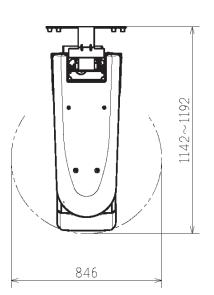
2: Standing position wall-mount short type: Panoramic type
